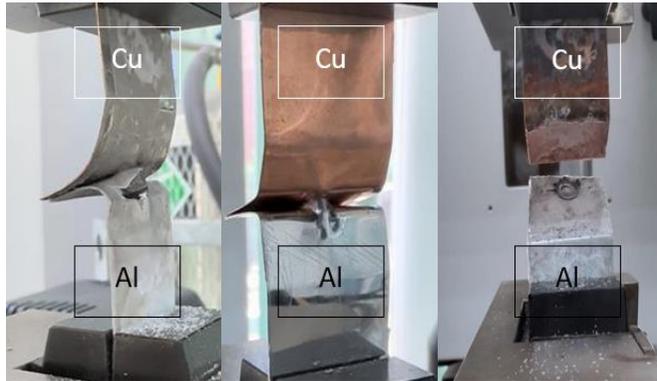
Failure modes observation of workpieces which connected by (a) bolt, (b) rivet, and (c) weld
